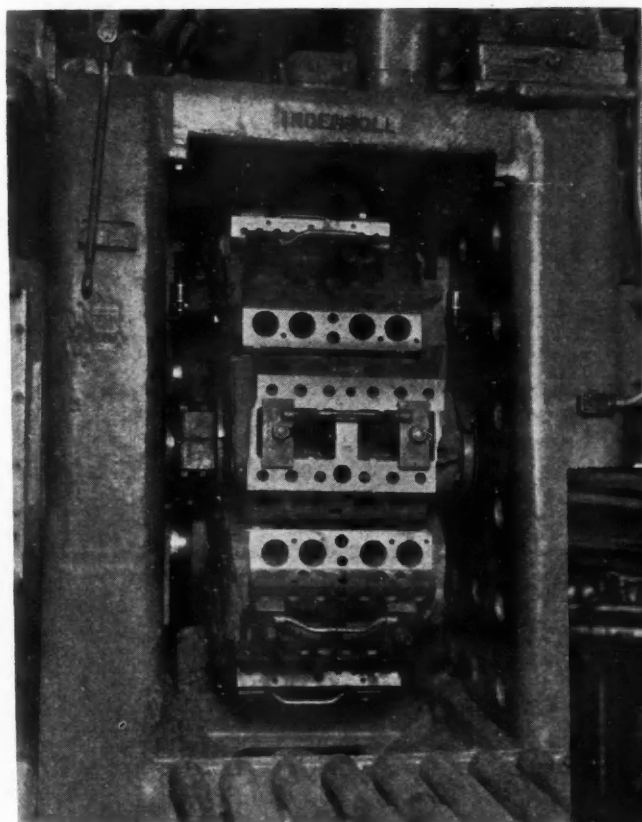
Close-up view of the fixture of drum type Ingersoll milling machine set up for rough and finish milling both ends of the block
